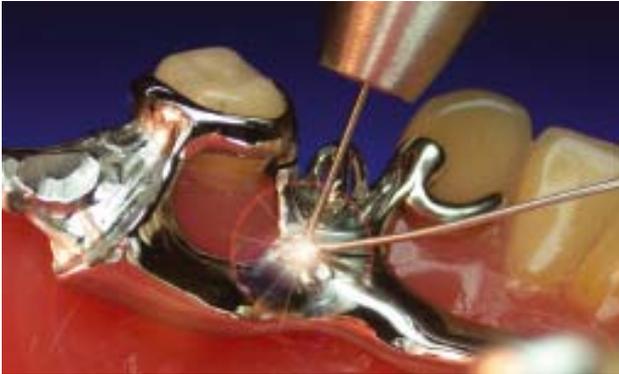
and 7: for Co-Cr welding always use machined carbon-free wires.
